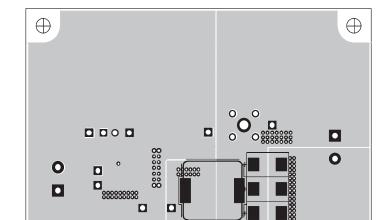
Bottom Side Assembly (Showing Optional Components)
